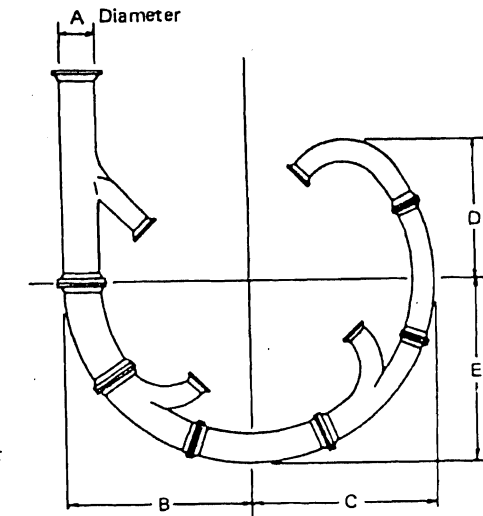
Dimensioning layout for typical four-nozzle spiral casing for Pelton turbines.
